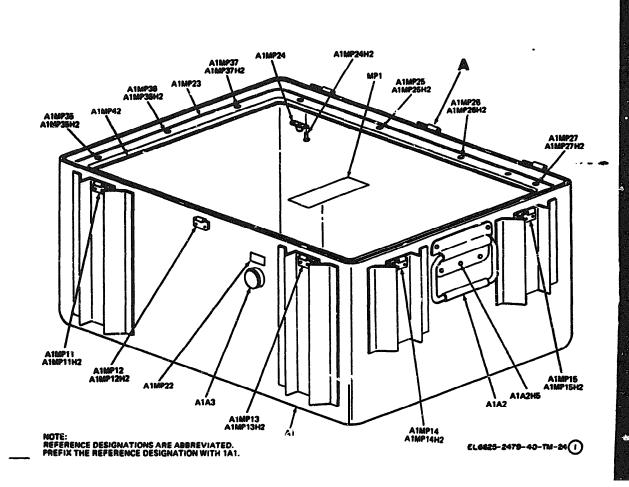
Case assembly 1A1, parts location (part 1 of 2).
